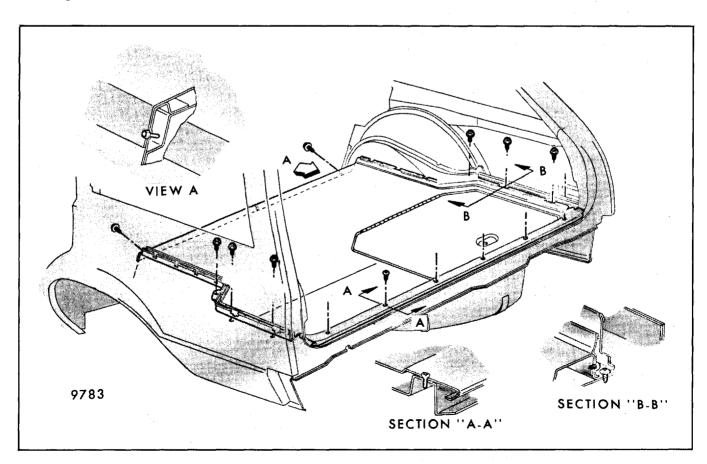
Luggage Compartment Panel Assembly Installation - A Styles
